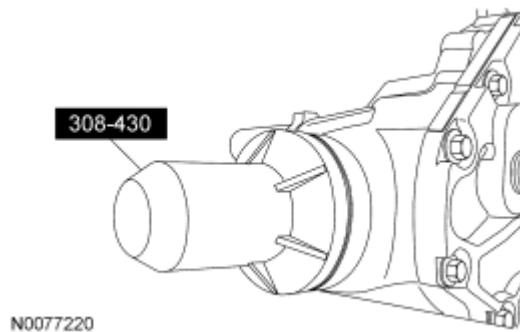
Installing Output Shaft Seal Using Special Tool (308-430)
